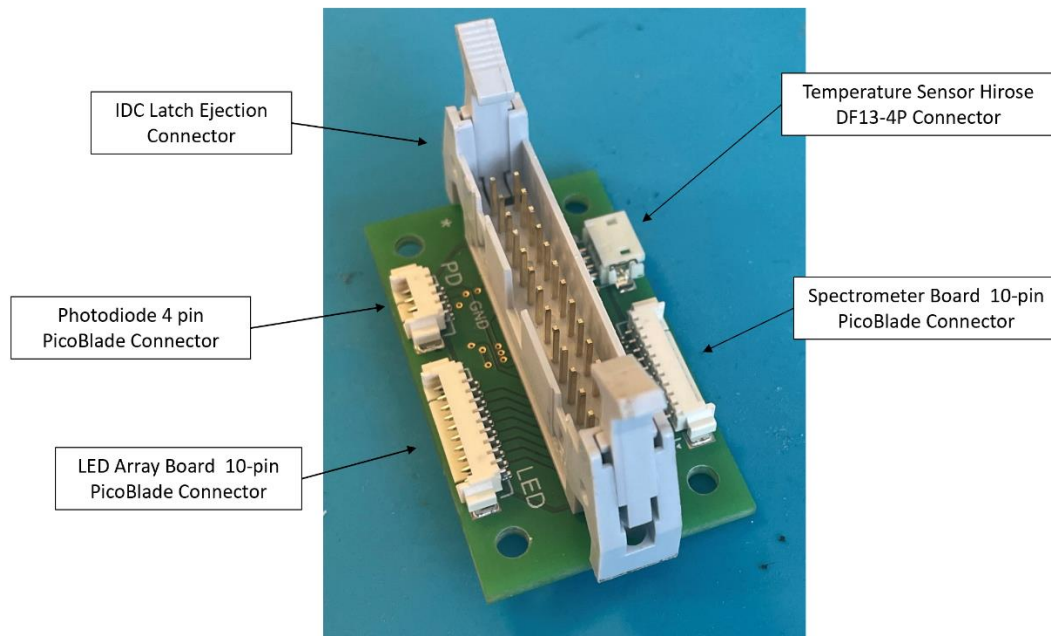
Labelled image of the assembled connector board PCB and connectors used to allow for pub and play operation.
